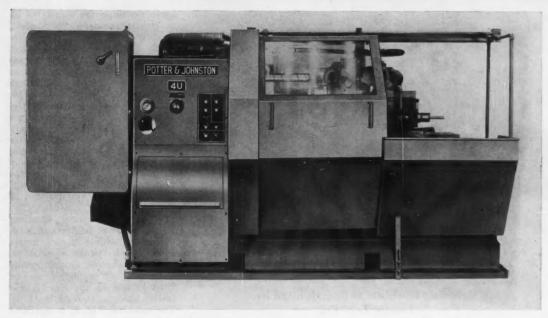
Potter & Johnston automatic turret lathe with welded steel bed
